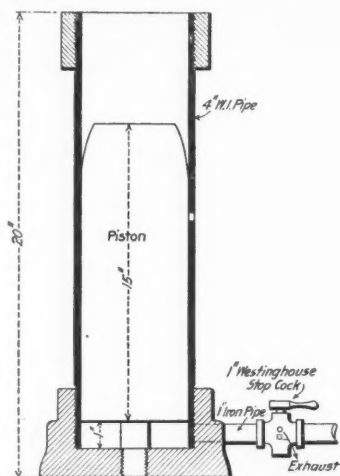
Pneumatic Hammer for Removing Frame-Bolts.
